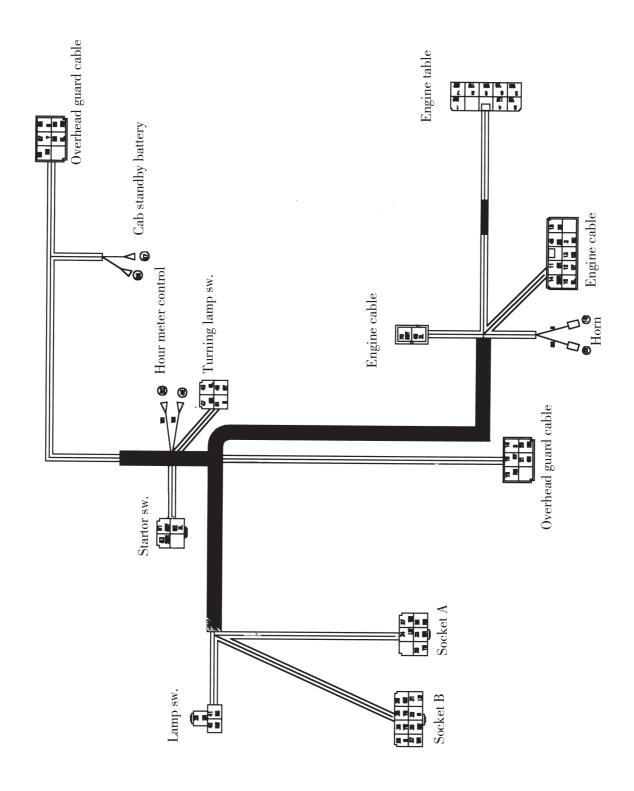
Engine wire harness. CPCD50-70-C -36-
